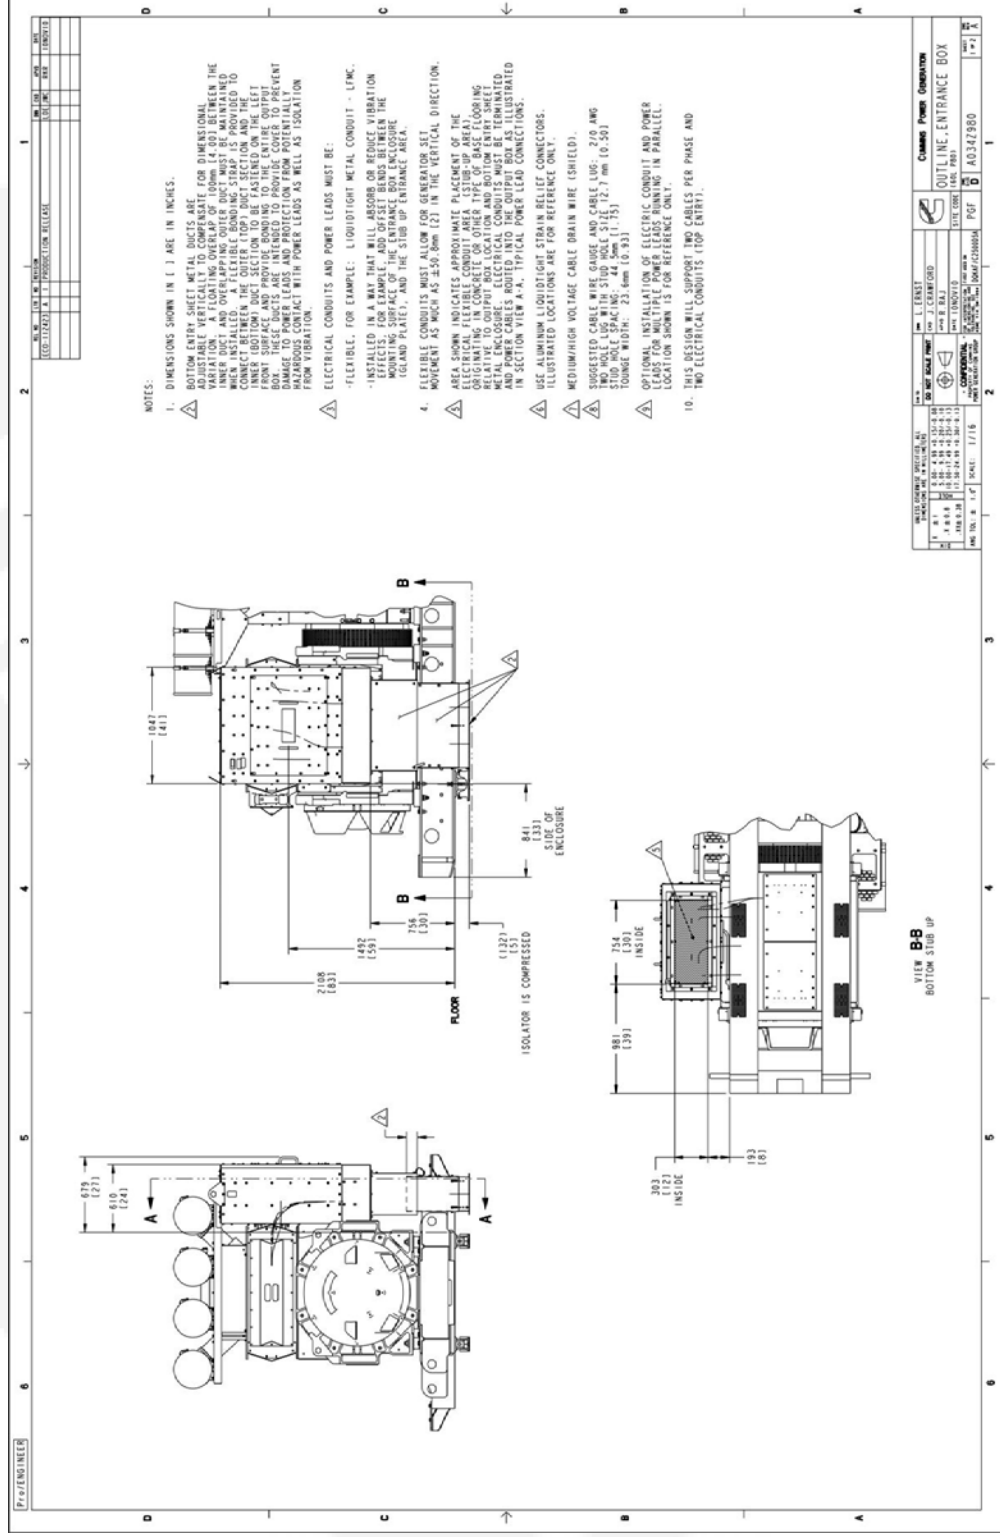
P80 ALTERNATOR ENTRANCE BOX OUTLINE DRAWING (SHEET 1 OF 2)
